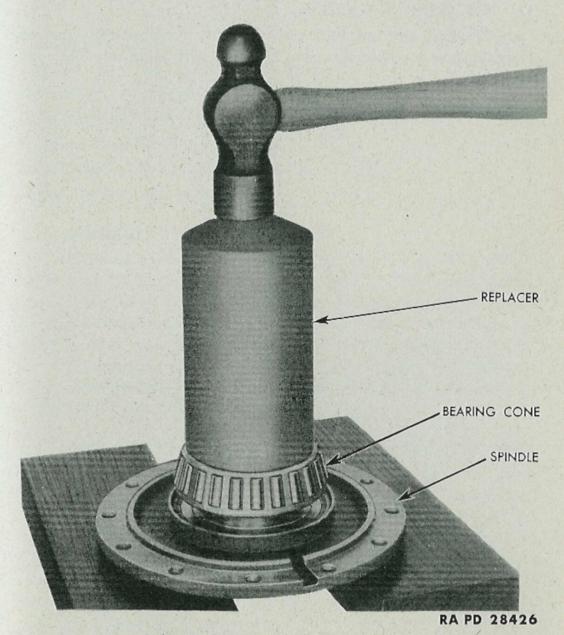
Installing Bearing Cone on Spindle with Replacer 41-R-2394-130
